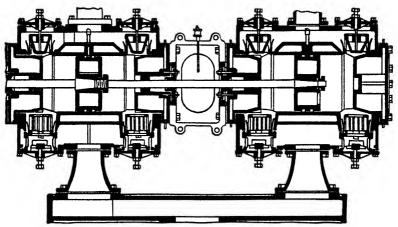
Oil supply for tandem cylinders and piston rod.
